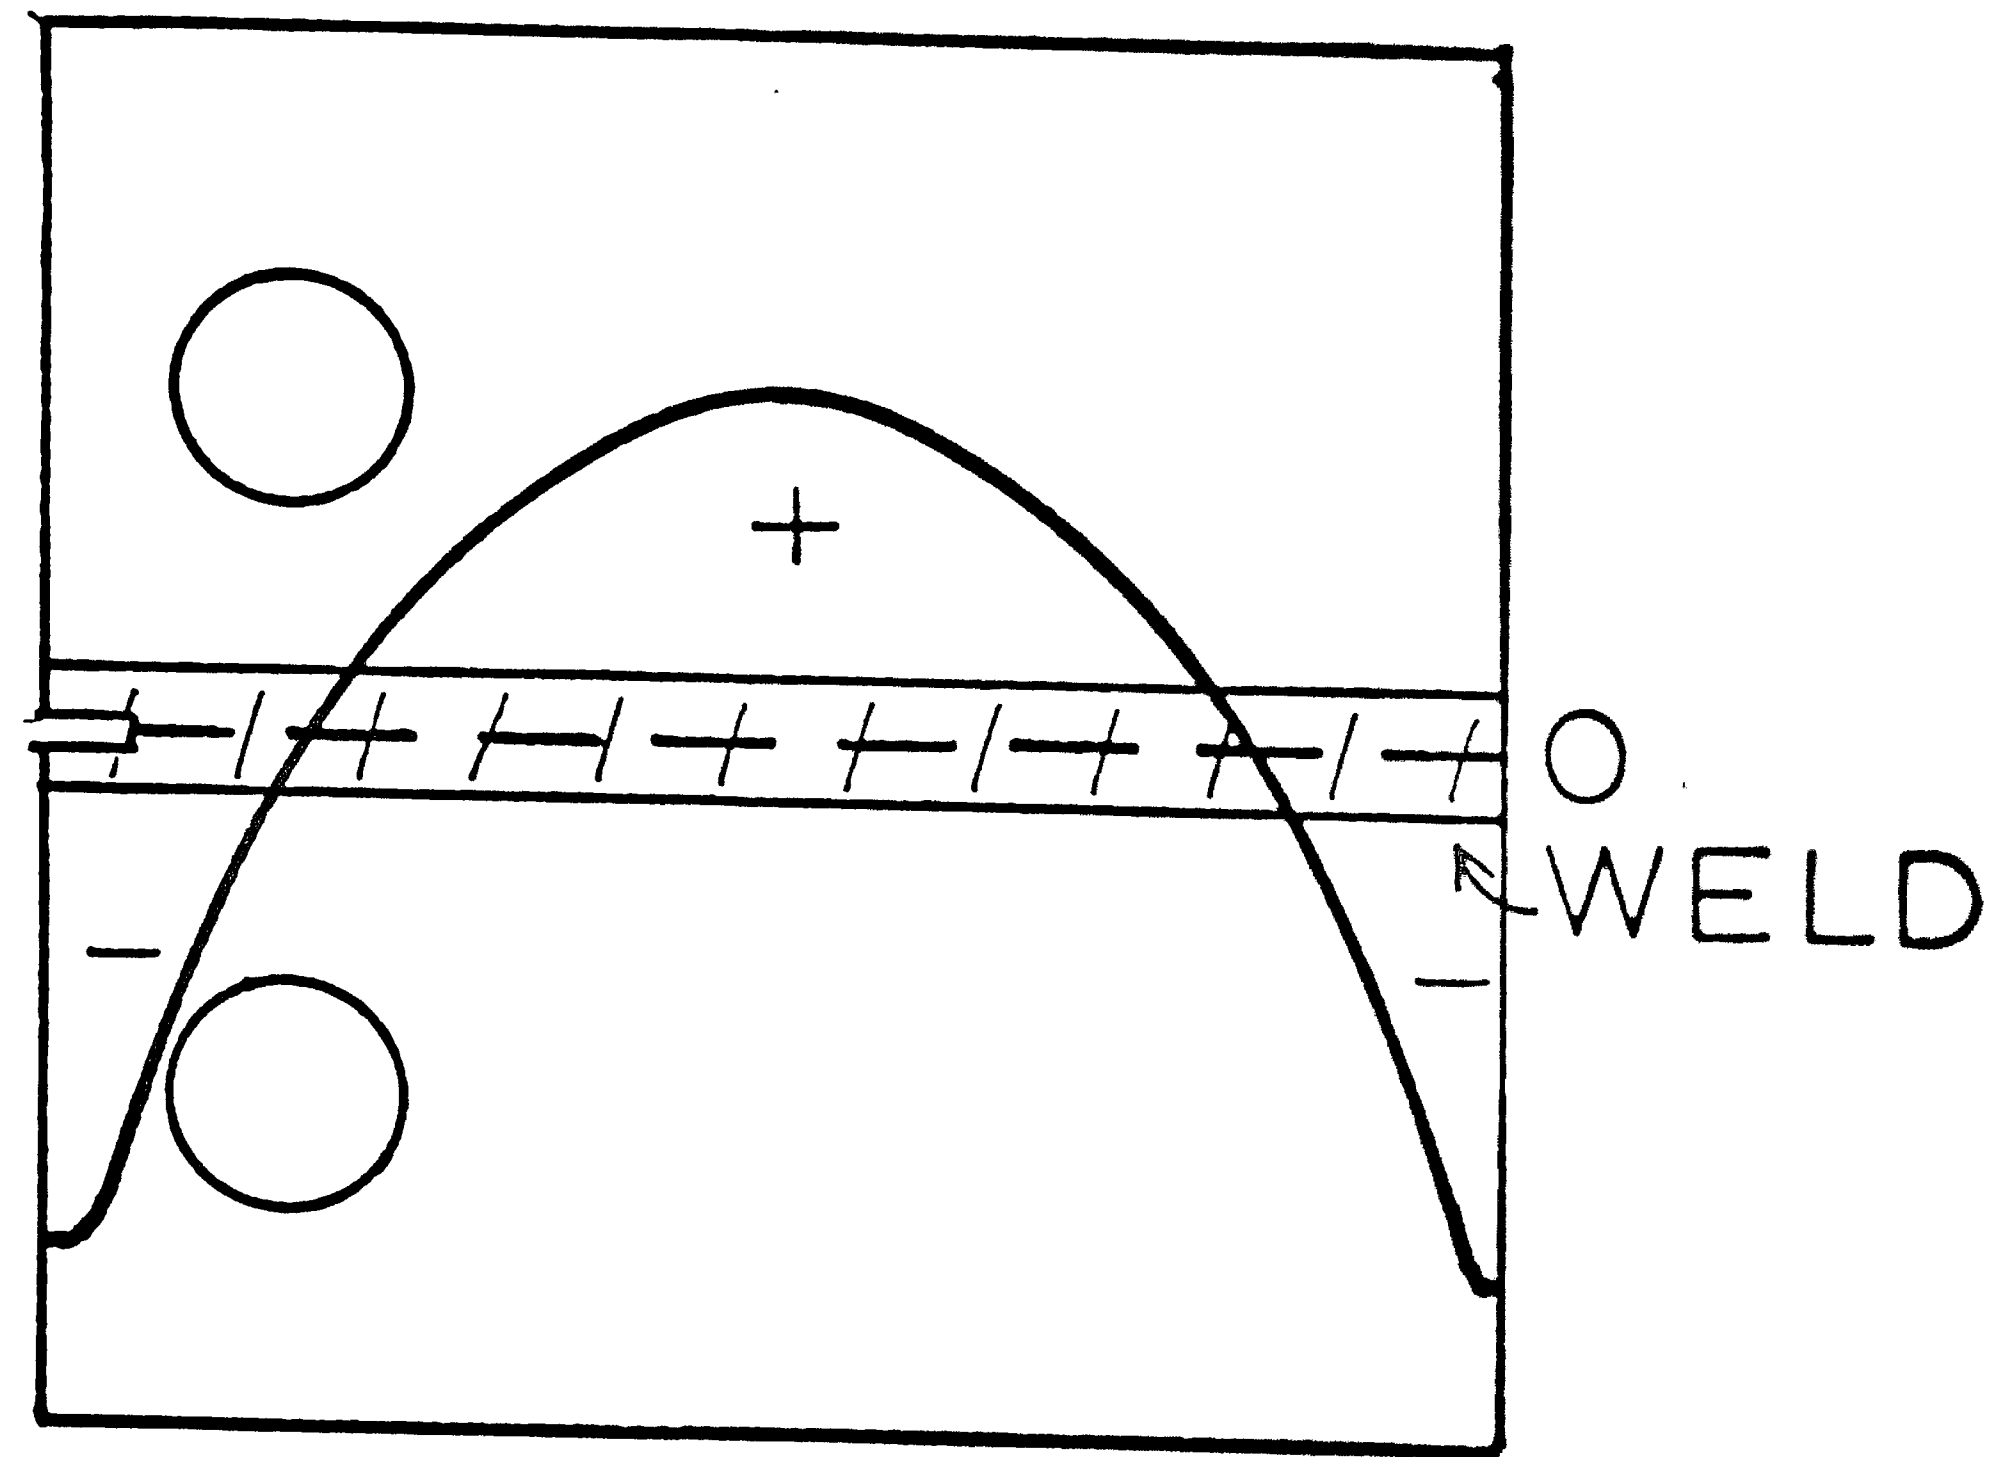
Residual Stress Patterns In The Neighborhood Of A Typical Butt Weld.
